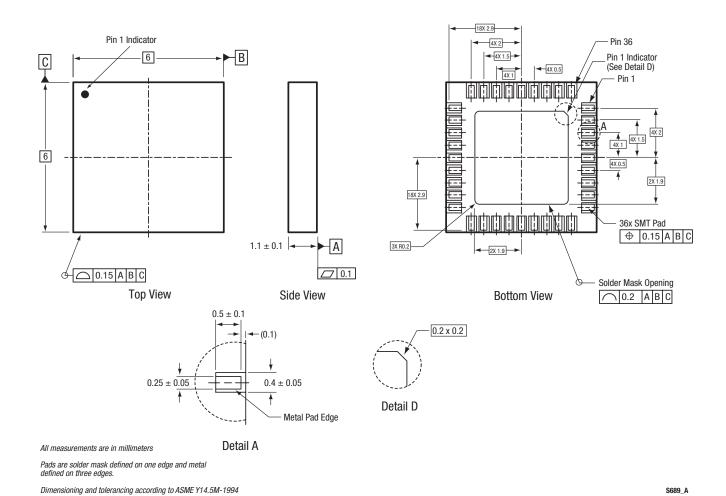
SKY73021 36-Pin MCM Package Dimensions
